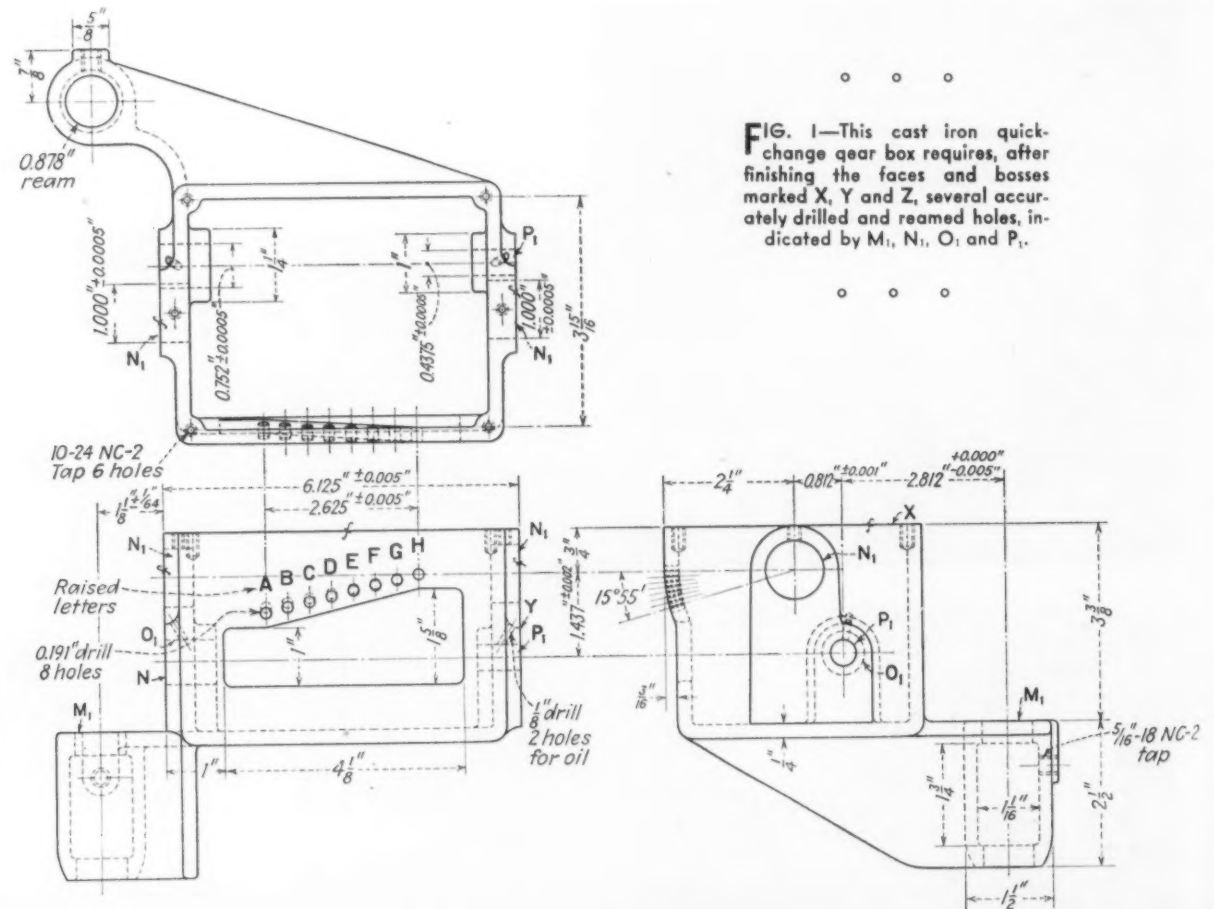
This cast iron quick-change gear box requires, after finishing the faces and bosses marked X, Y and Z, several accurately drilled and reamed holes, indicated by M₁, N₁, O₁ and P₁.
